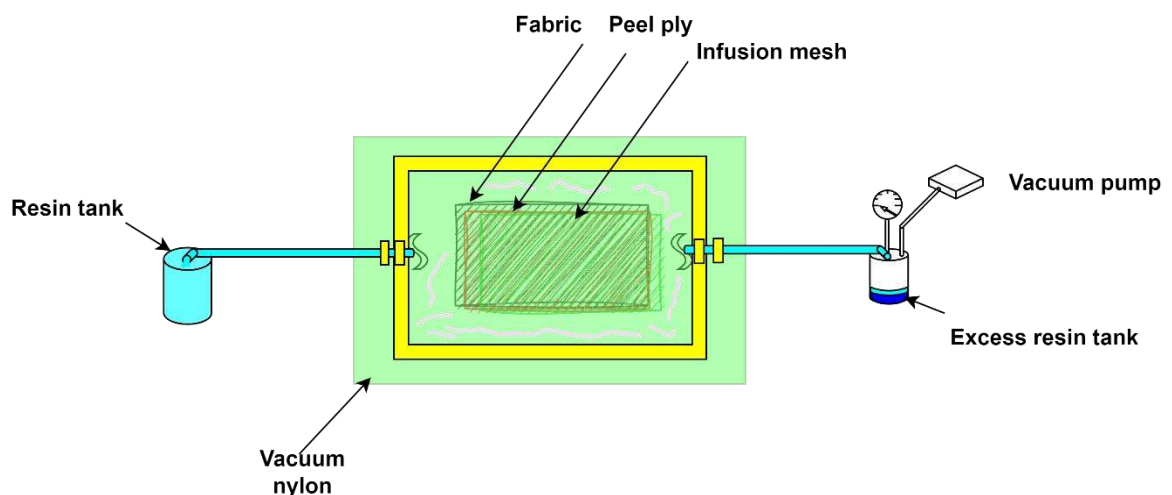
The schematic view of vacuum assisted resin transfer molding method
